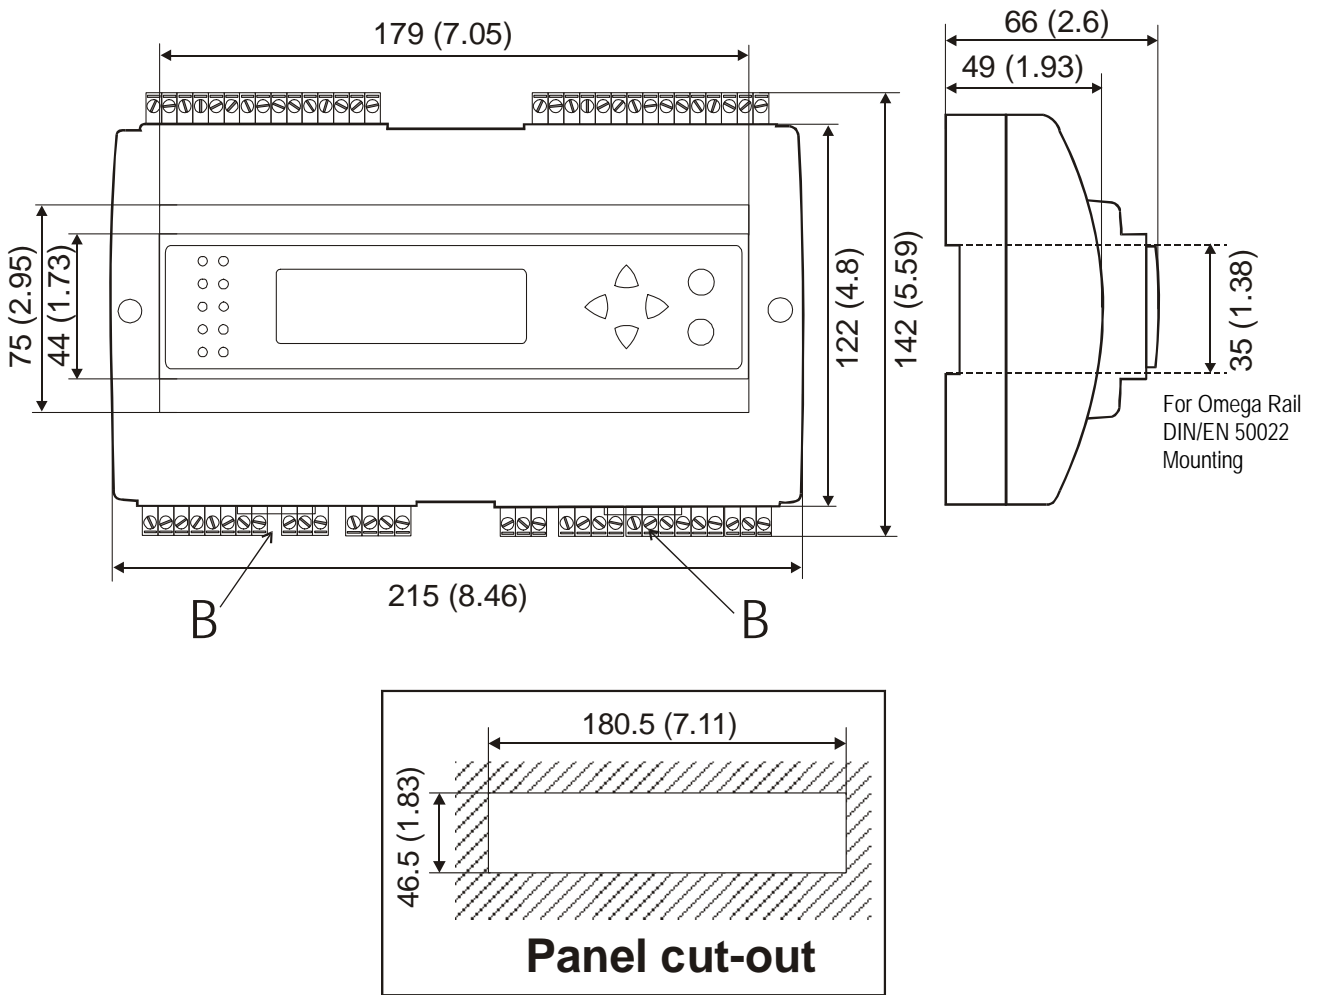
FX15 with Integrated MUI and Panel Cut-Out Dimensions, mm (in.)
